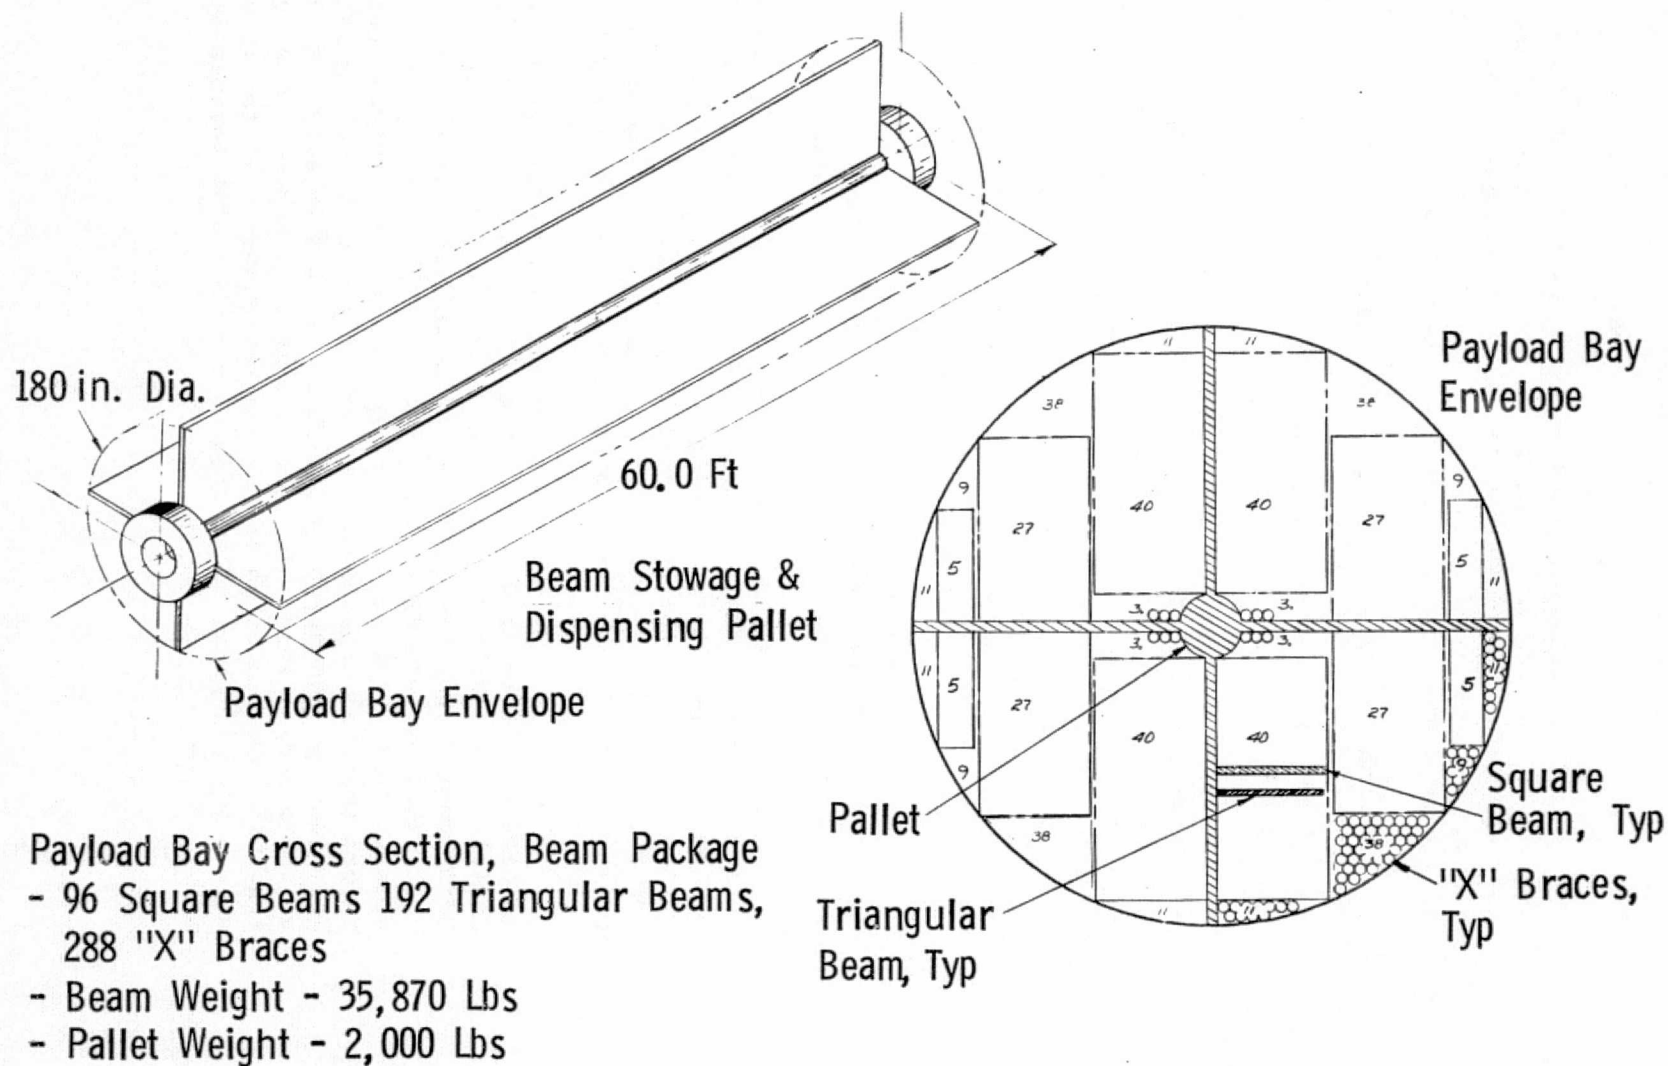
Beam Pallet and Shuttle Payloads Section
